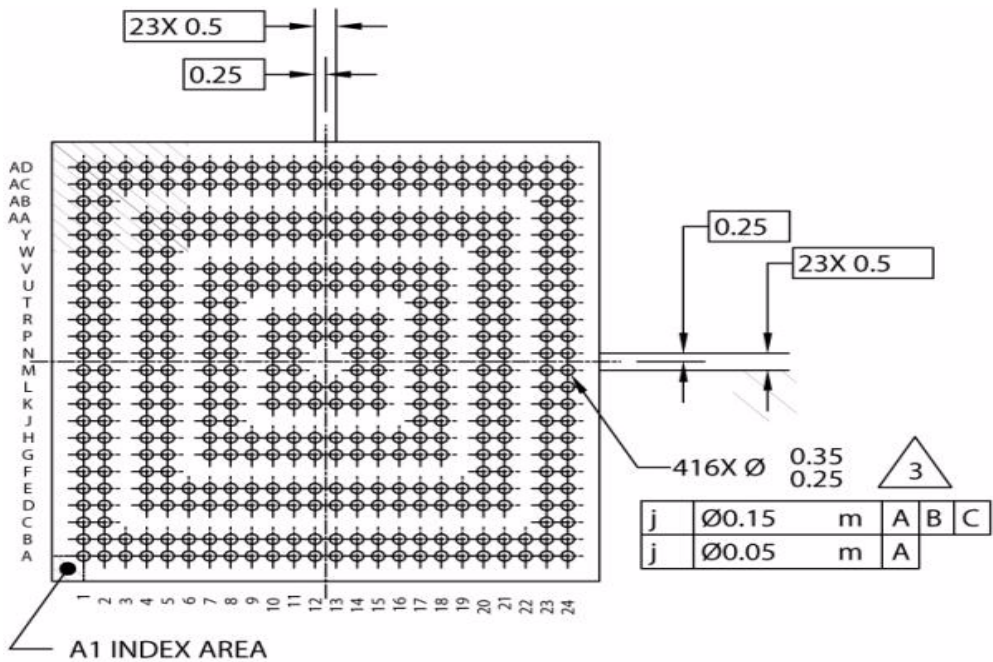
416 MAPBGA 13x13 mm Package Bottom View
